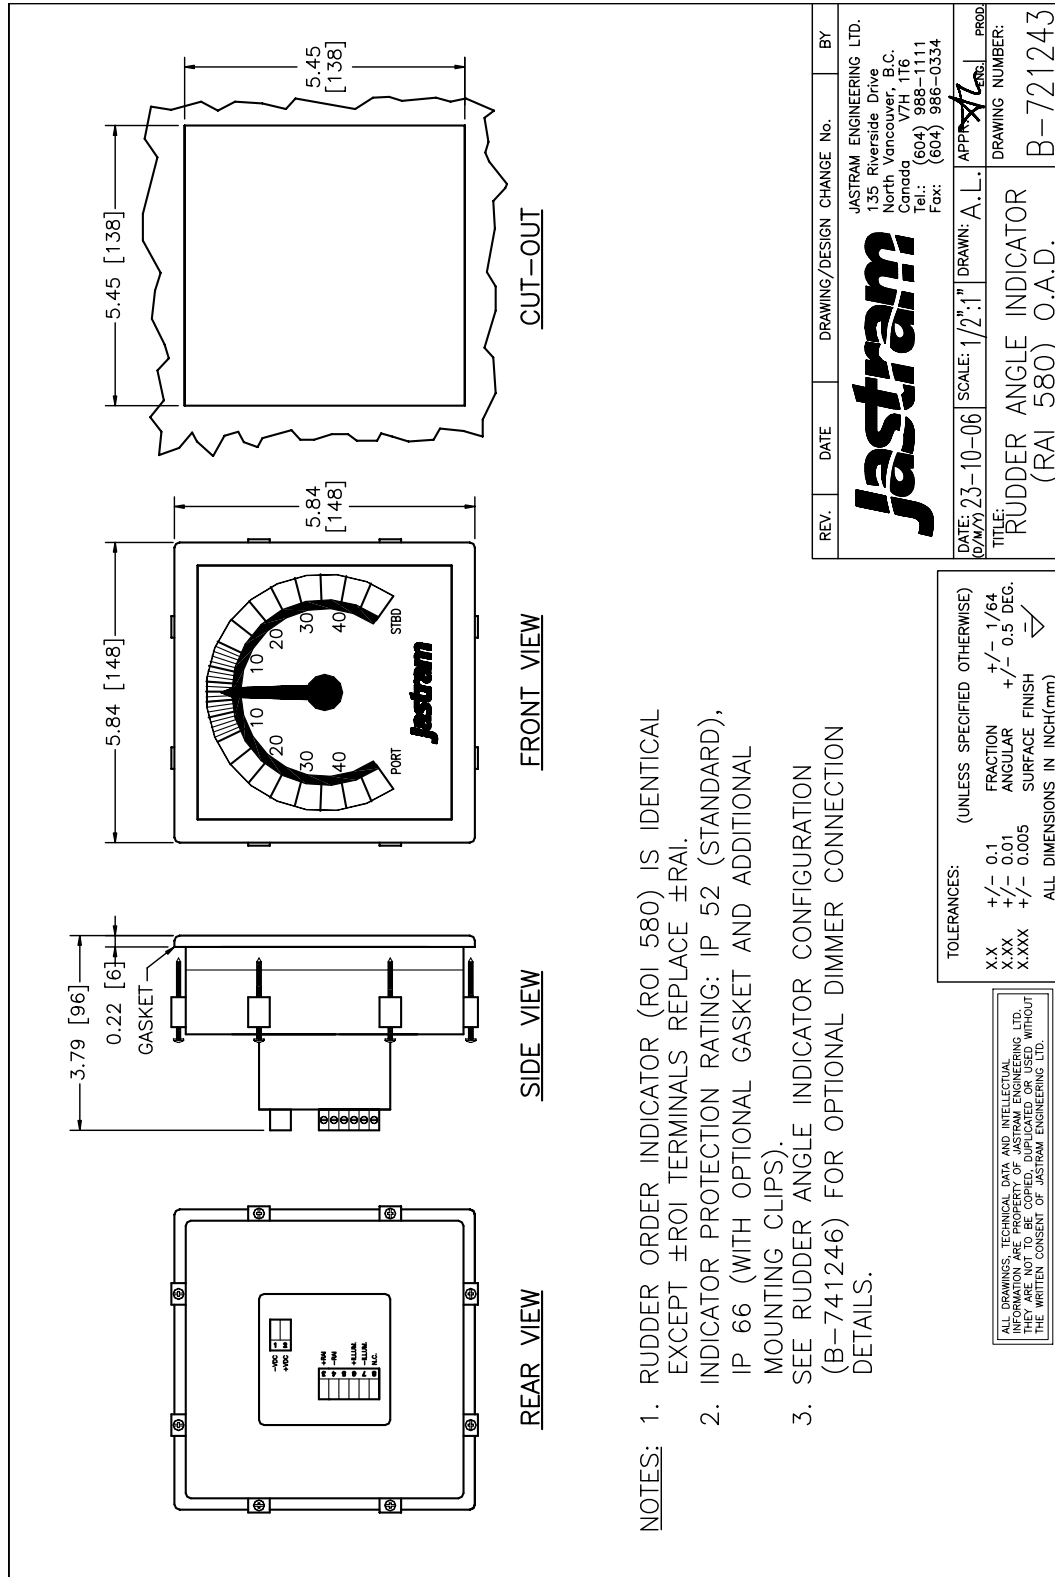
RUDDER ANGLE INDICATOR (RAI 380) OVERALL DIMENSIONS
